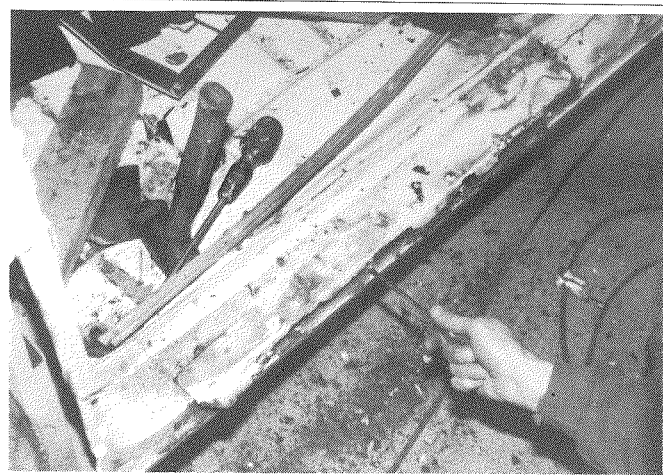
Drill out the pop rivets securing the alloy finisher and lift off. The edge of the tread plate simply disintegrated.
